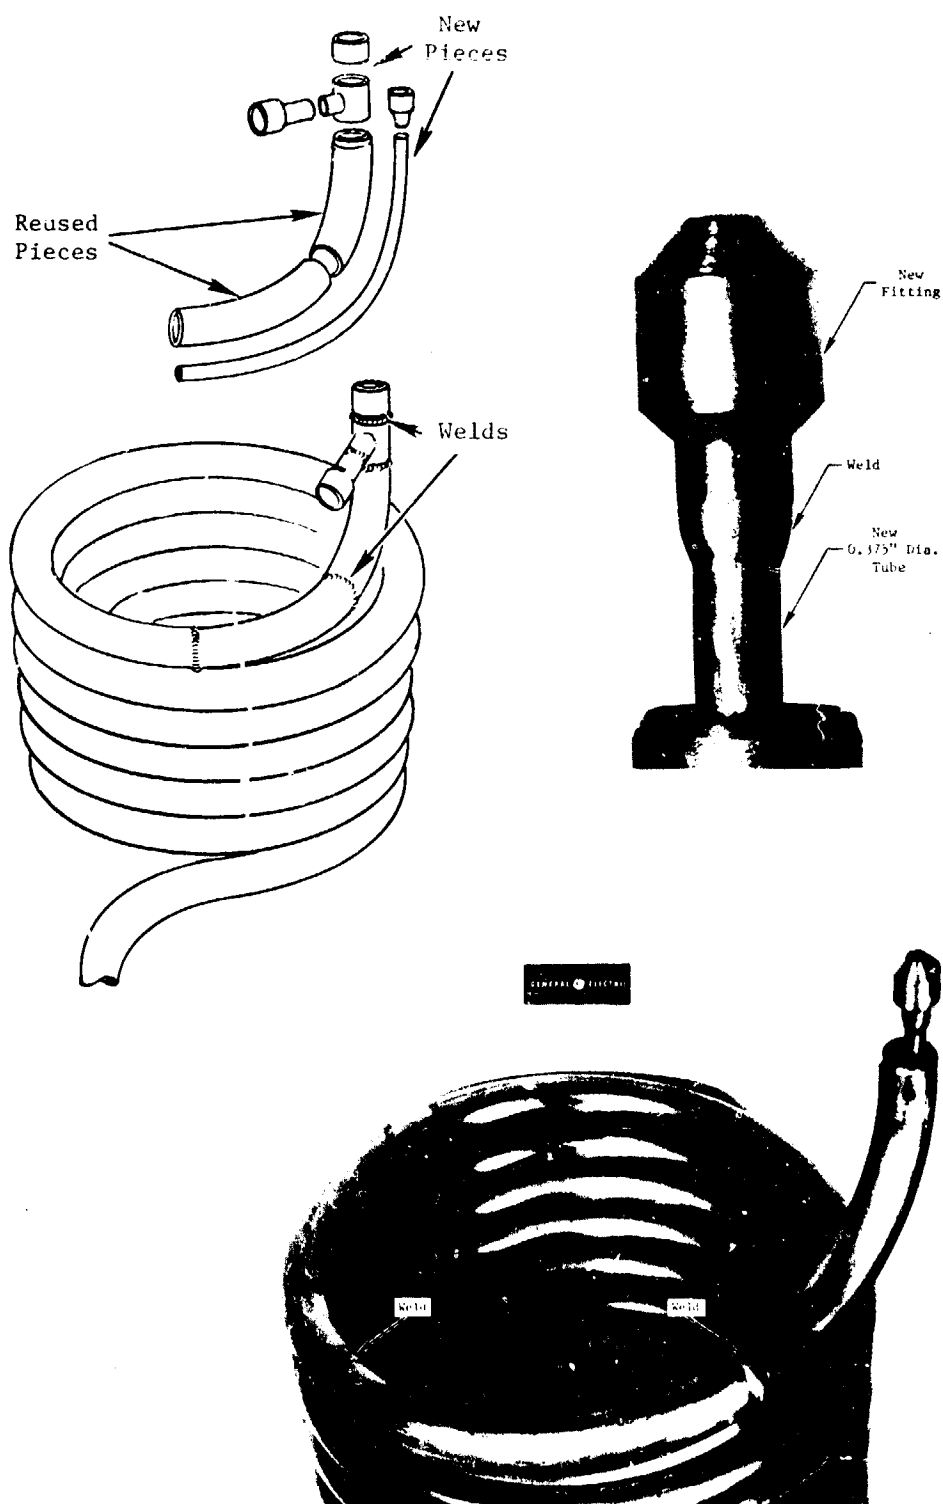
Top of the Boiler Following Initial Repair Welds.
